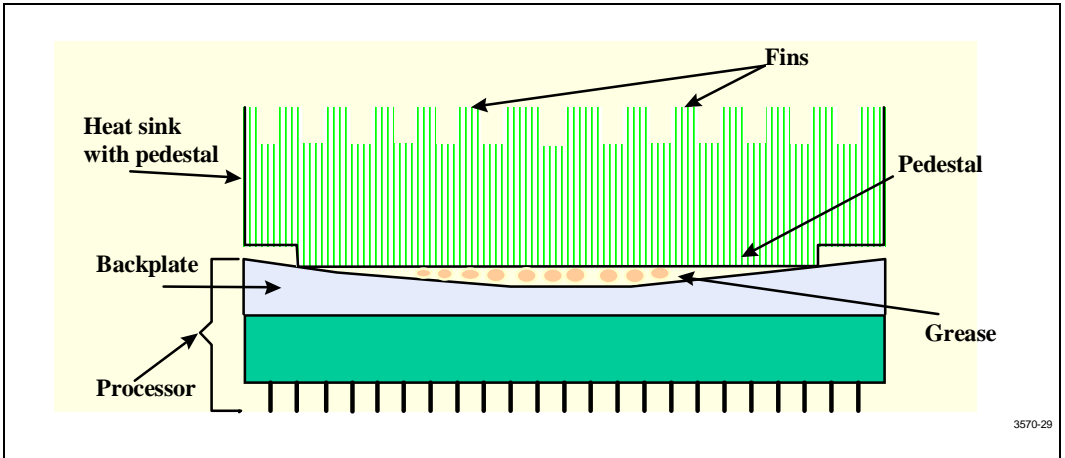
Heat Sink with Pedestal Placement on Processor Side View
